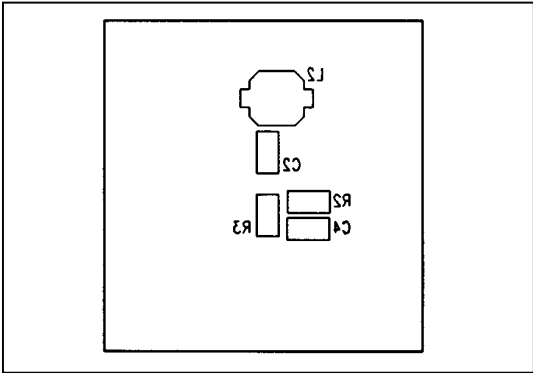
MAX778 EV Kit Component Placement Guide (Solder Side)
